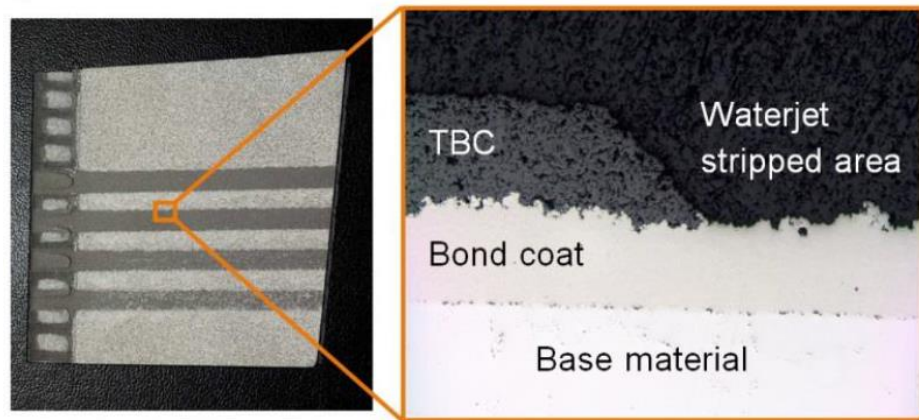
TBC removal without damaging bond coat using AWJ process [37].
